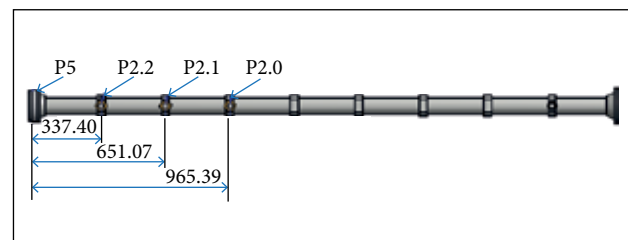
Position of the pressure sensors along the driven (dimensions in mm).
